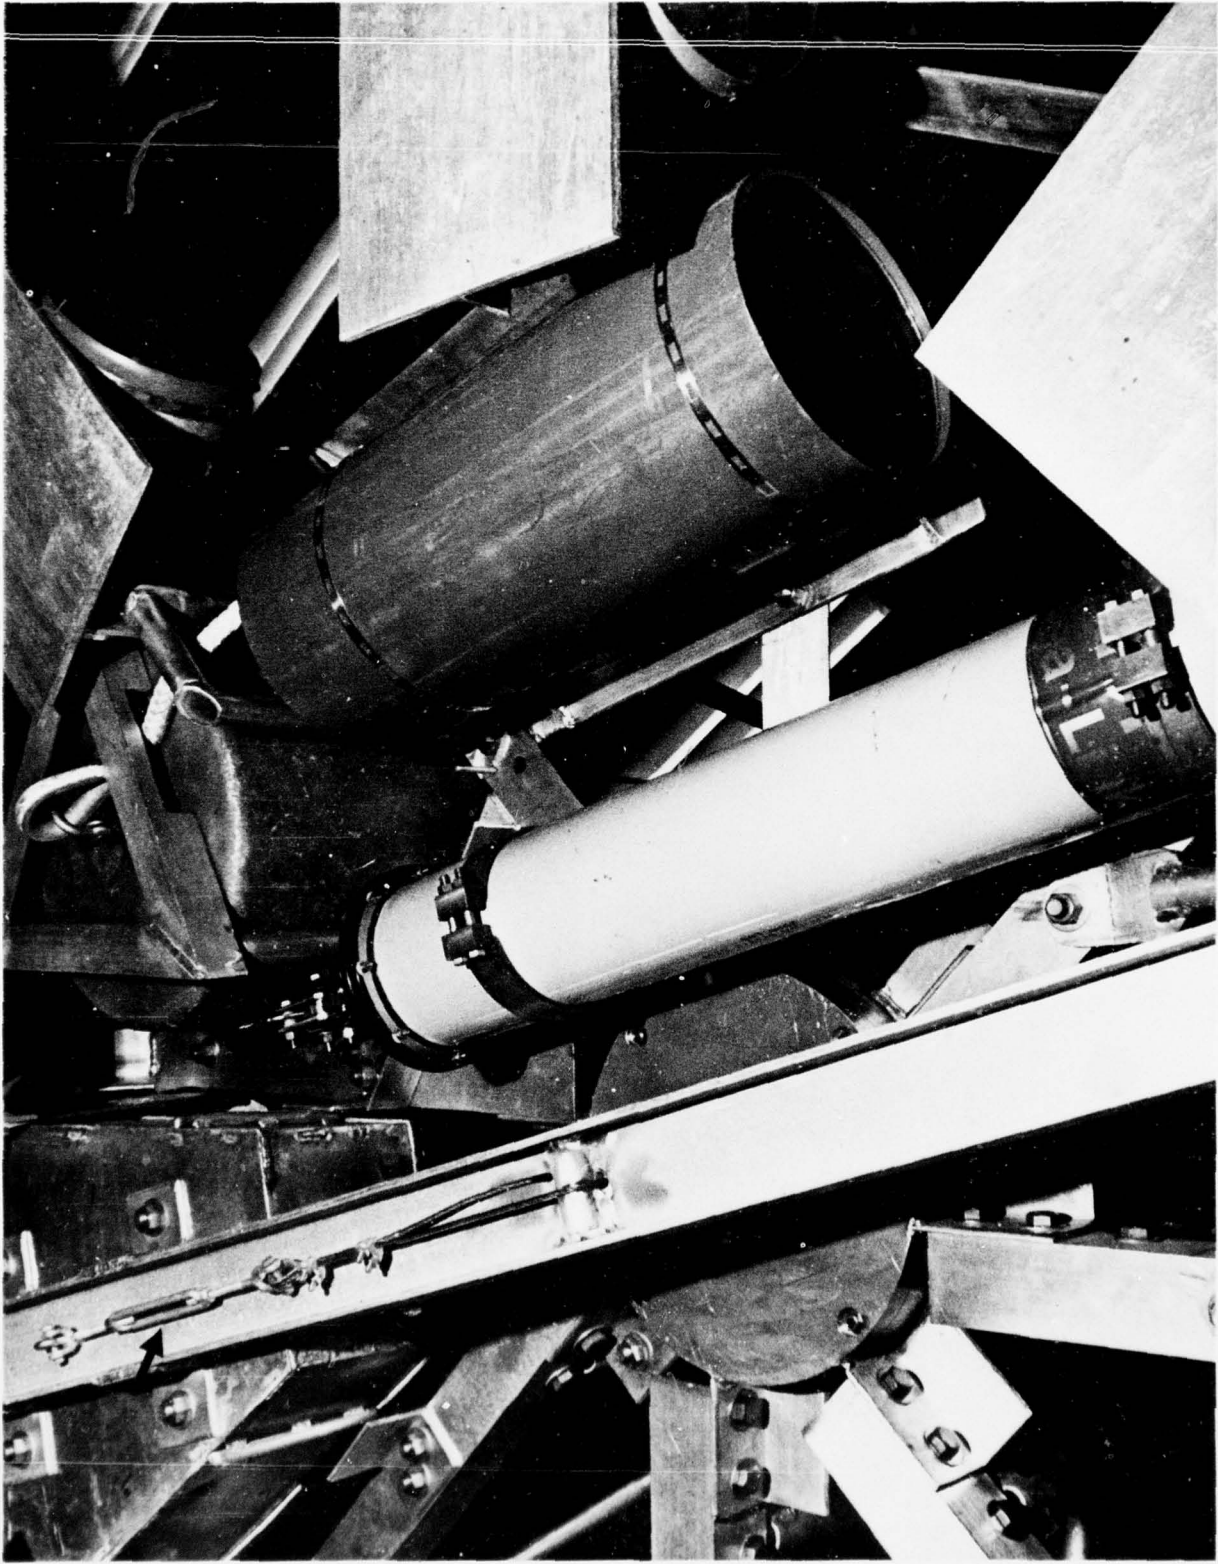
Stainless Steel Hinge Cable Adjustment At Base of Lever Arm
